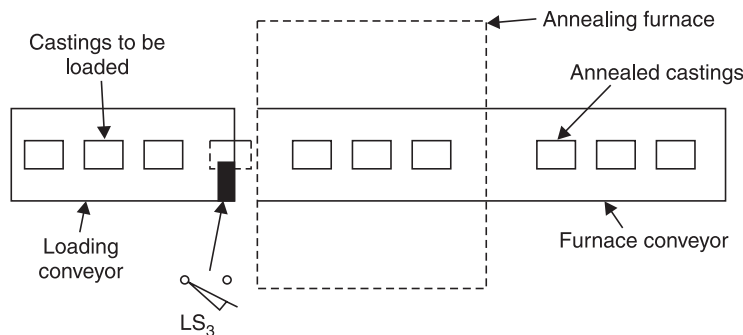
Plan layout of automatic loading of castings into Annealing furnace using conveyors
